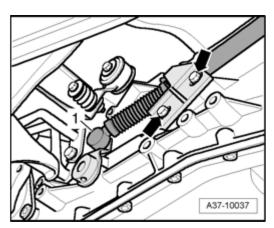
Pressing Ball Socket Of Selector Lever Cable From Selector Shaft Lever & Removing Bracket On Transmission
